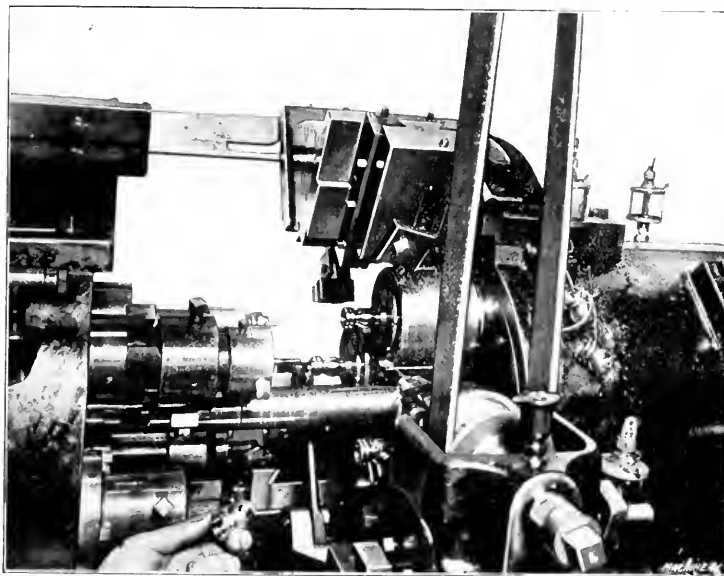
A Good Example of Cross-drilling on the "Acme" Multiple-spindle Automatic Screw Machine
